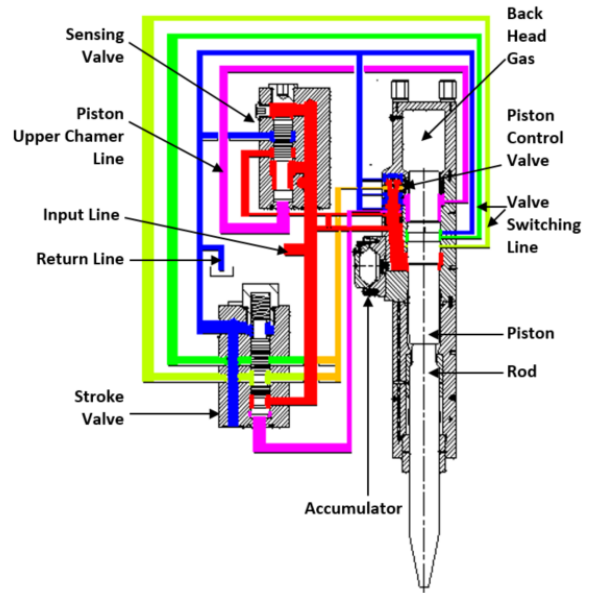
Schematic cut view of a hydraulic breaker with the automatic impact force control mechanism
